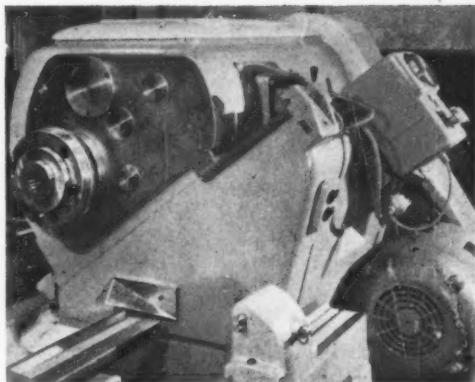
Close-up rear view of headstock showing the inclined slide and vernier scale on the Heid copying lathe
